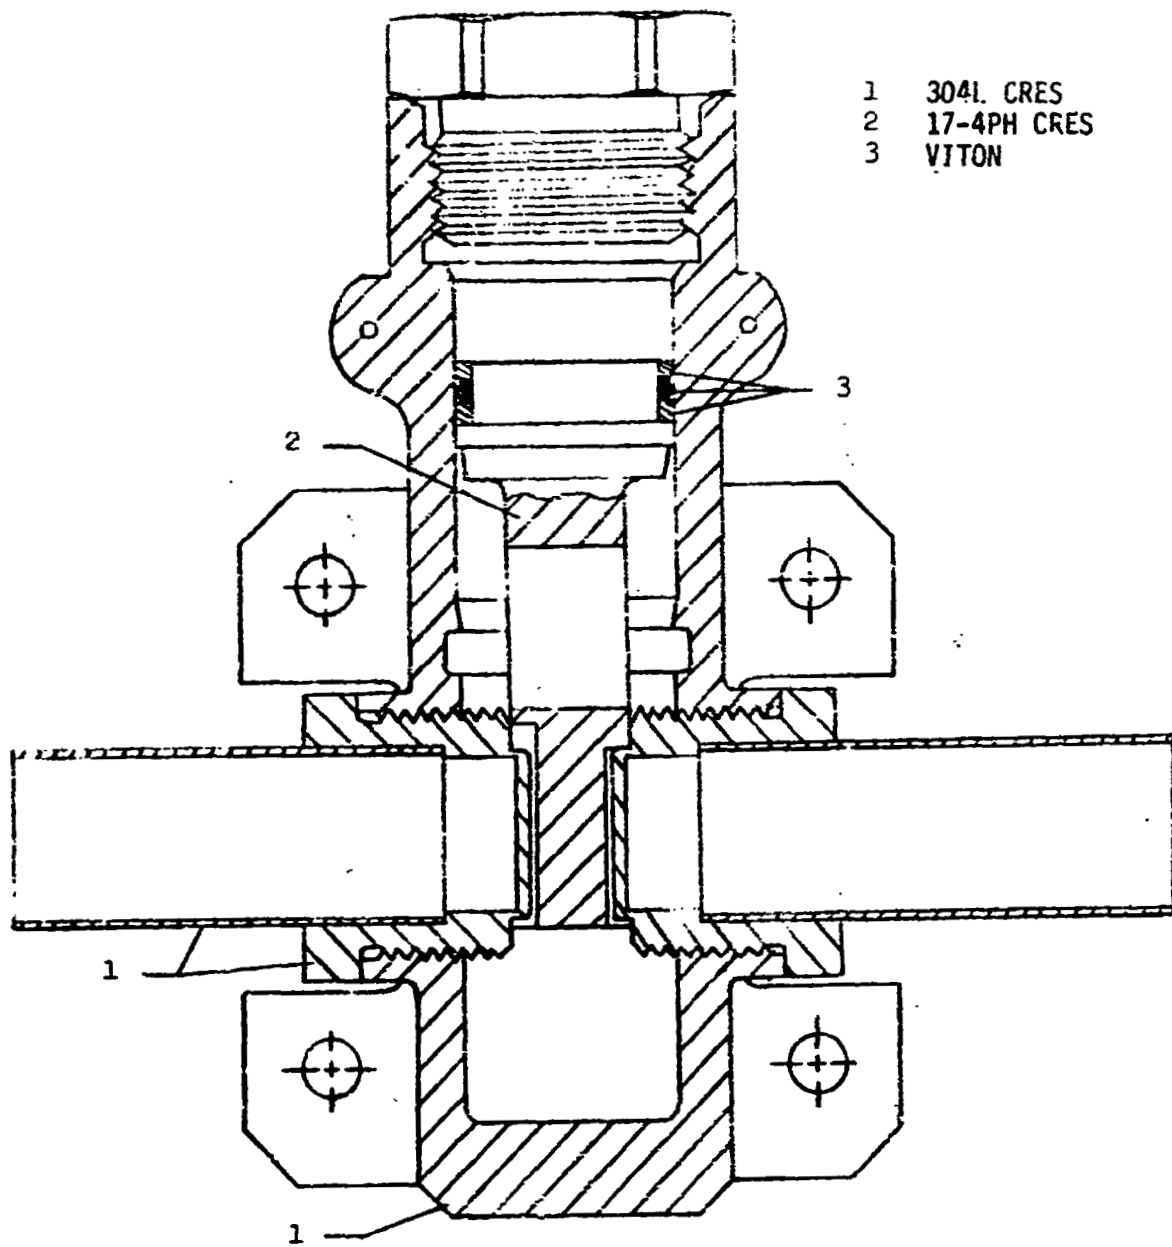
PROPELLANT EXPLOSIVE VALVE.
